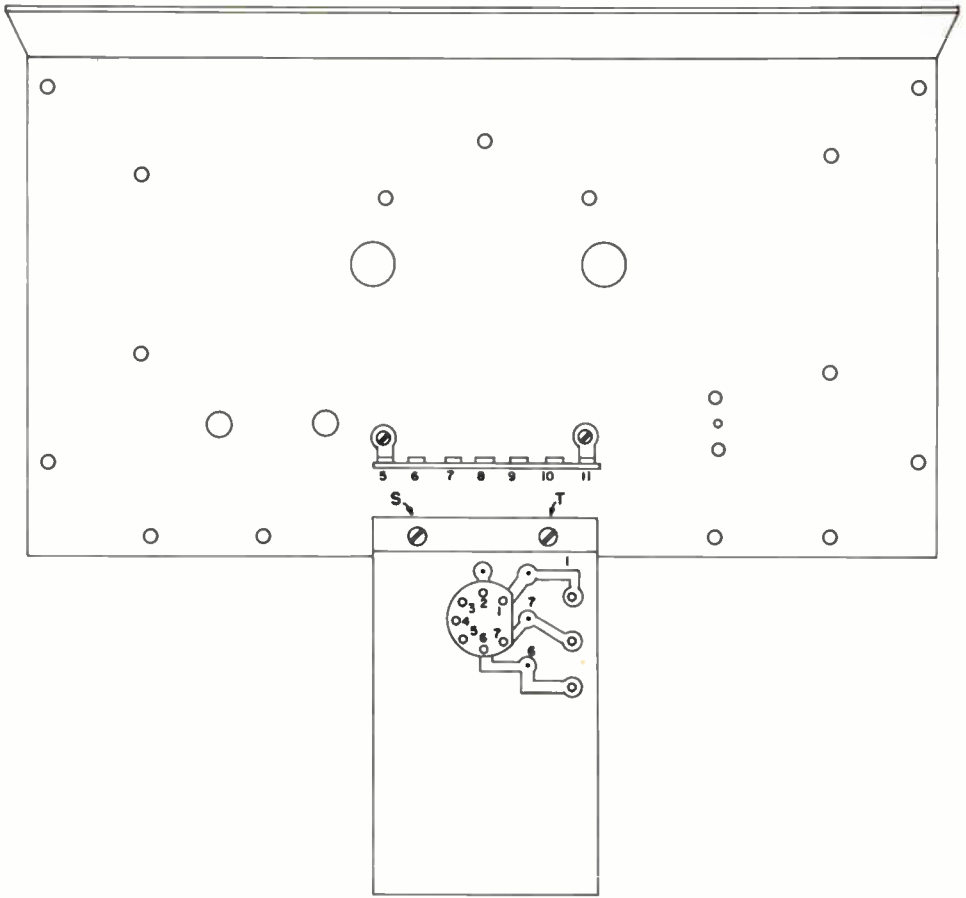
Mounting the circuit board on the experimental chassis.
